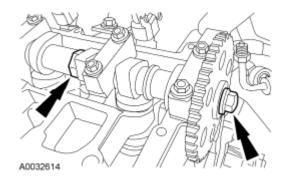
Locating LH Timing Chain Guide Bolts Courtesy of FORD MOTOR CO.
